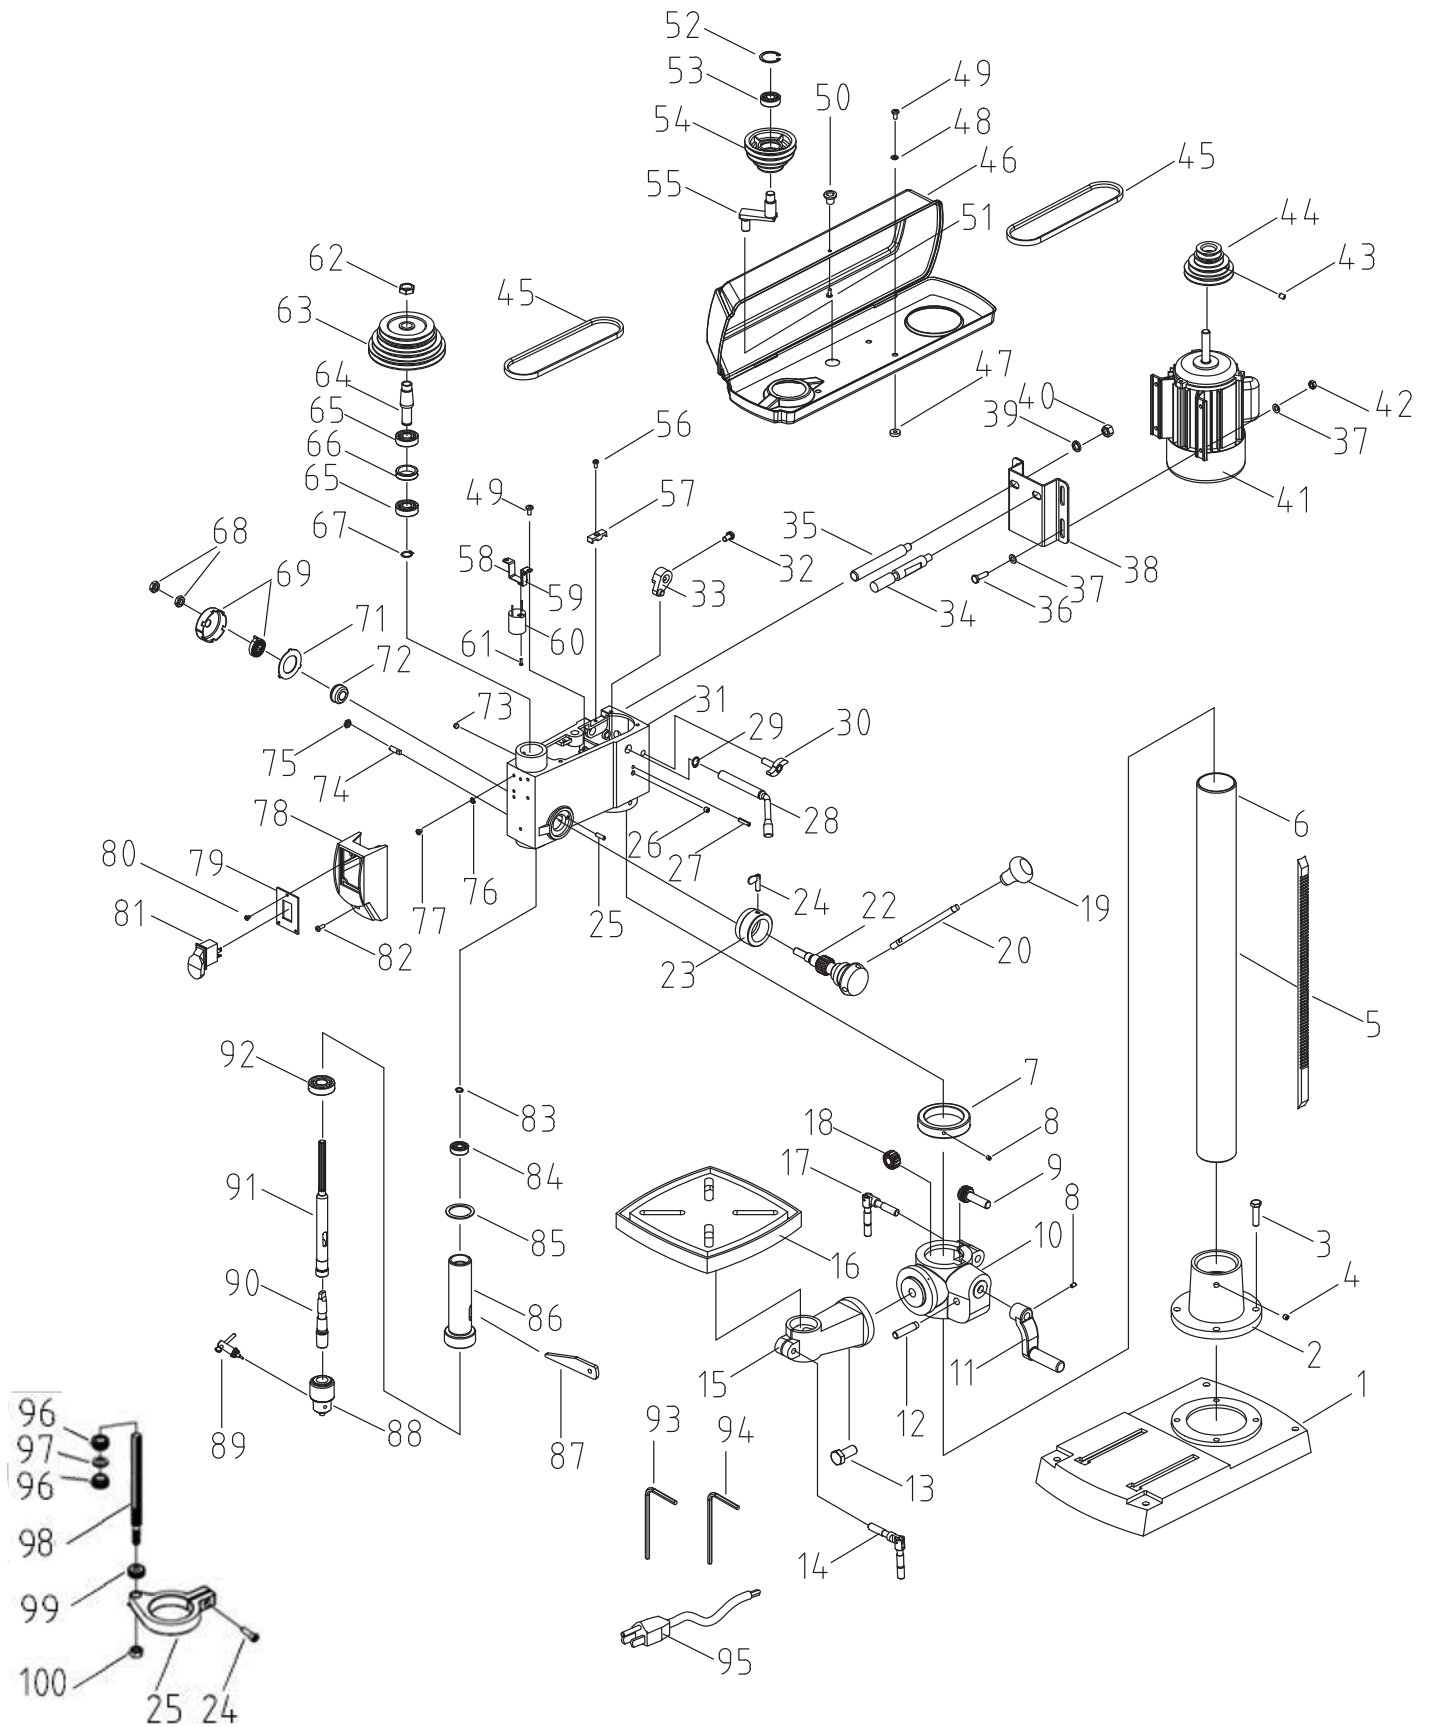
Parts illustration for 13" Bench Top Drill Press.
